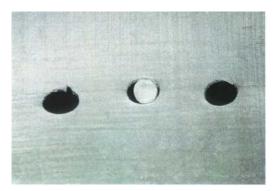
Clean-cut hole (right), incomplete cut with residual tag of dam (center), and irregular hole following removal of residual tag (left).
